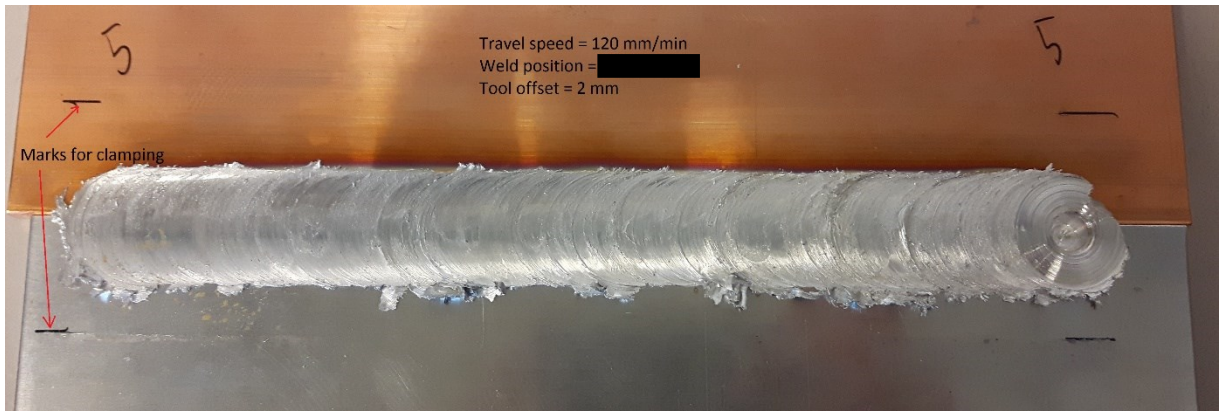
Visual surface analysis of the most aesthetically pleasing DoE weld, weld no. 5
